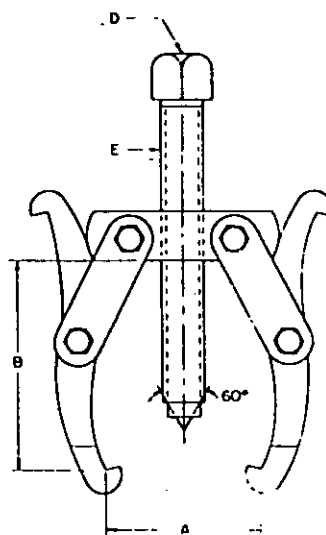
Type I, class 1, style B, puller, mechanical, gear and bearing, two-jaw, external, single end grip.
